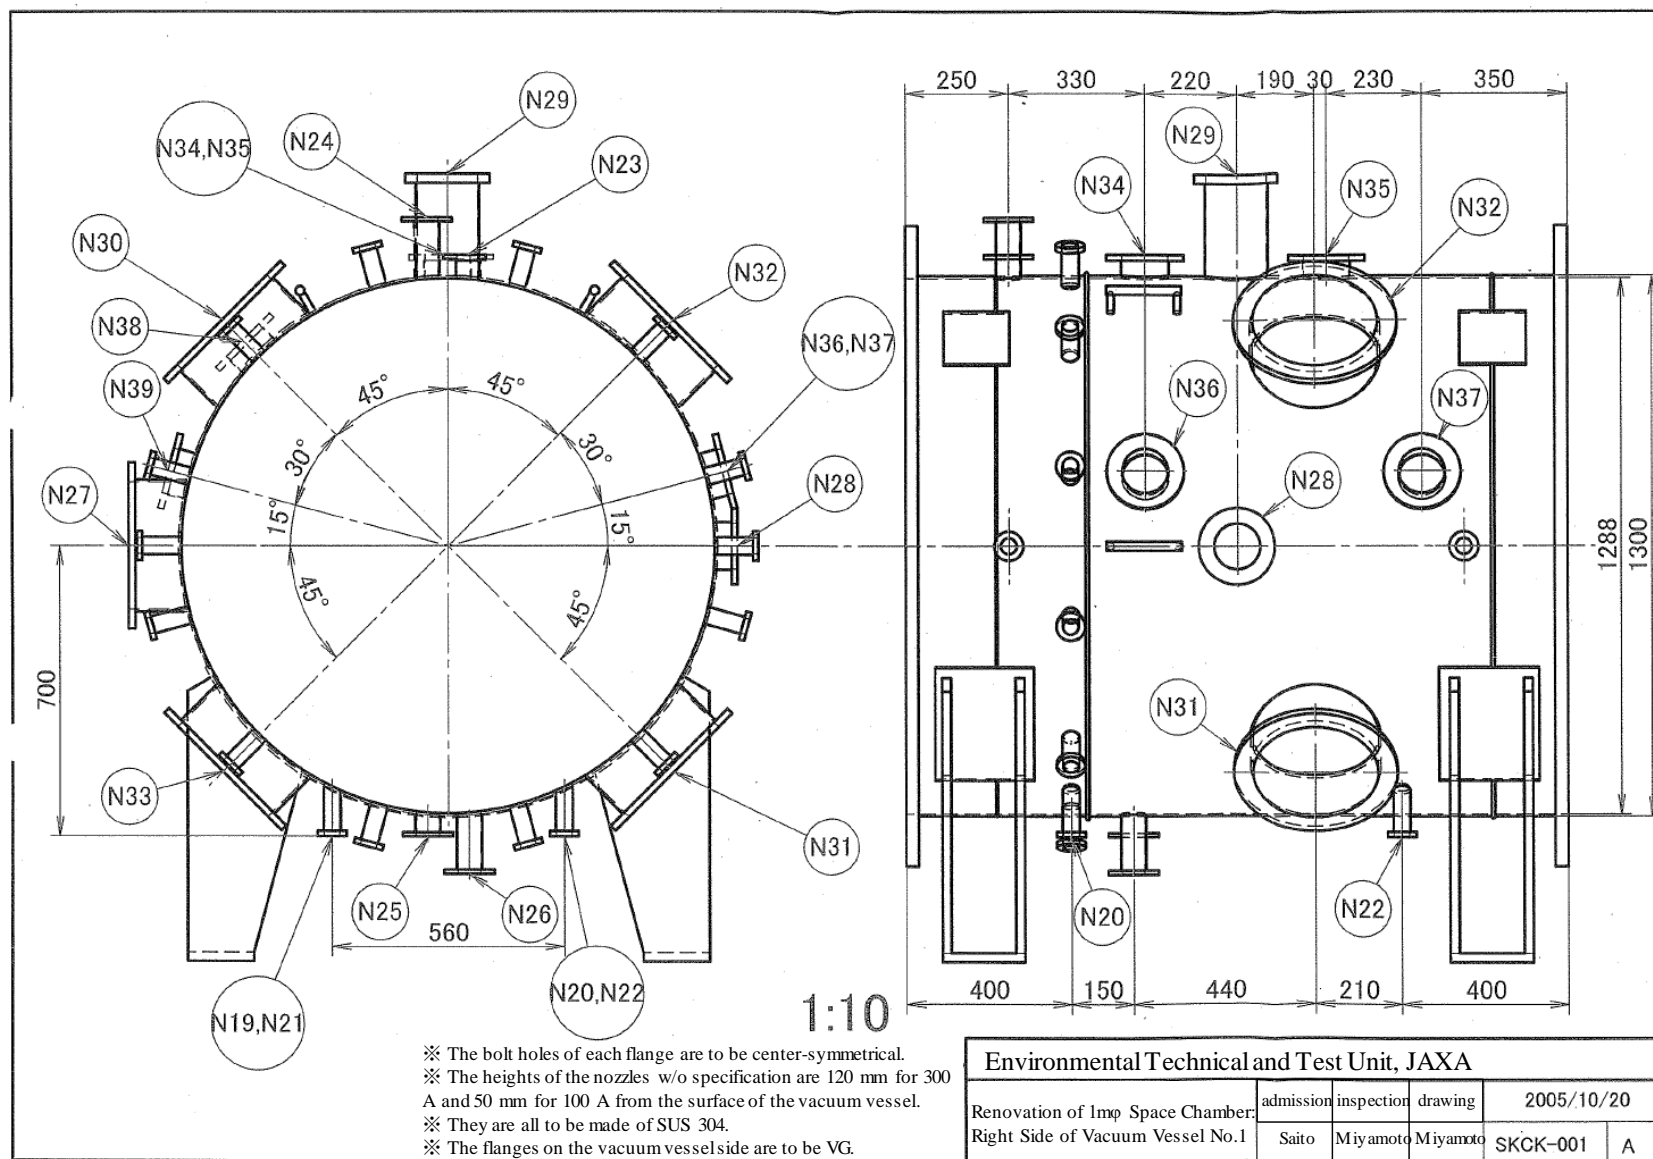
SKCK-001A Renovation of 1mφ Space Chamber: Right Side of Vacuum Vessel No.1
